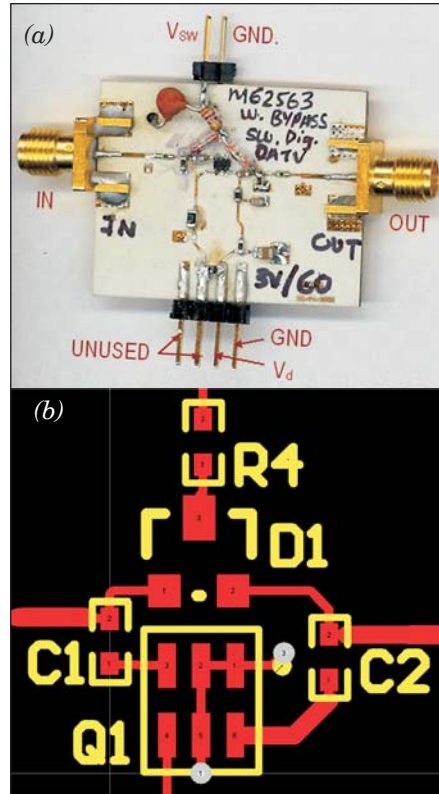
· (a) The “proof-of-concept” prototype; (b) the PCB layout revised to accommodate an SOT-23 surface mount PIN diode pair in the position D1.
